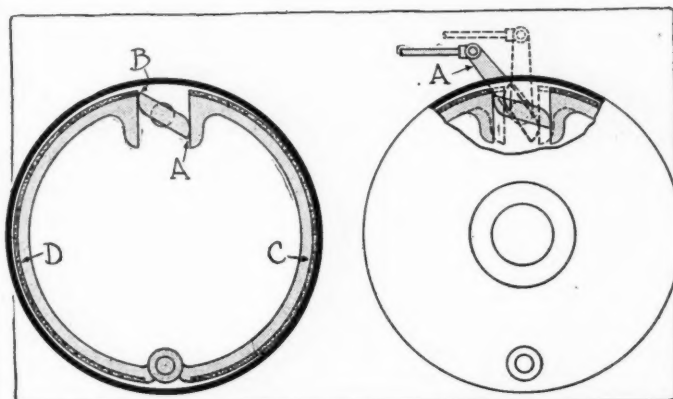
Left—At beginning of motion, shoe C of brake tends to make contact with drum before shoe D, because the inner end A of spreading cam is nearer to brake center than the other end B. As cam approaches horizontal this effect vanishes
